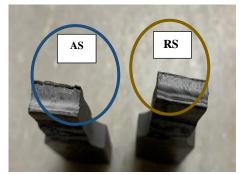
Fracture of A-SKEW tensile specimen at 1400 rpm
